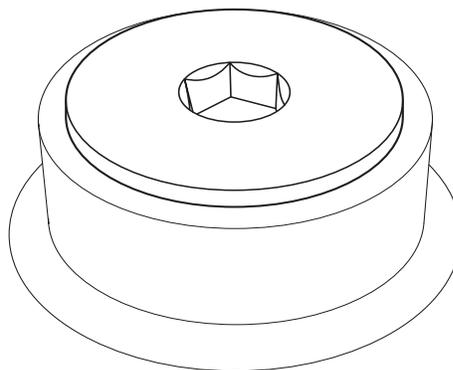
Remove Fill Plug from Hydraulic Oil Tank
